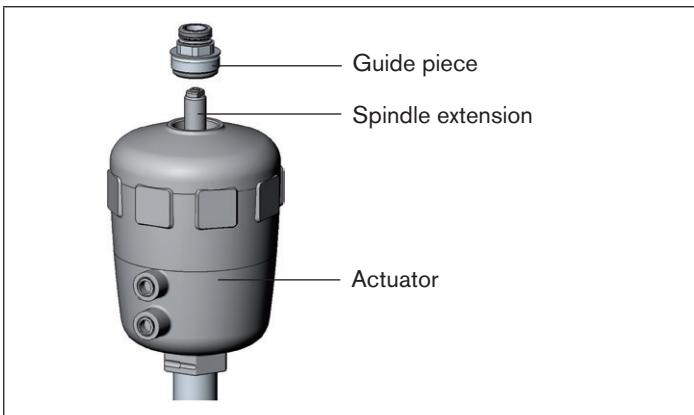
Installing the switch spindle, series 26xx and 27xx - 1
